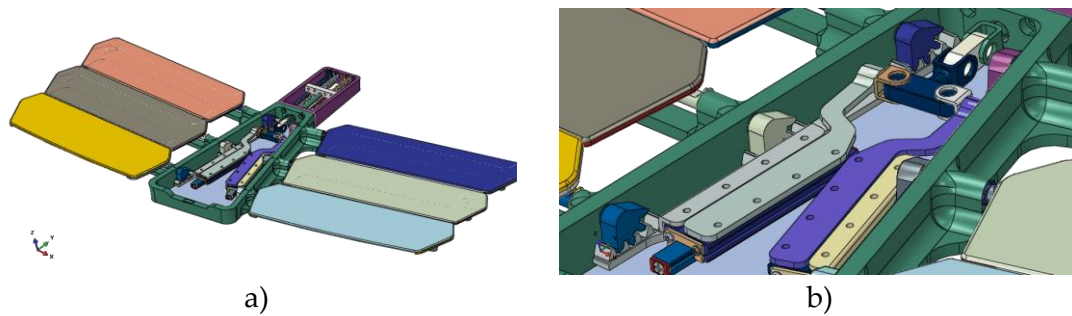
(a) configuration #1 assembly; (b) details on Crankcase and joints.
